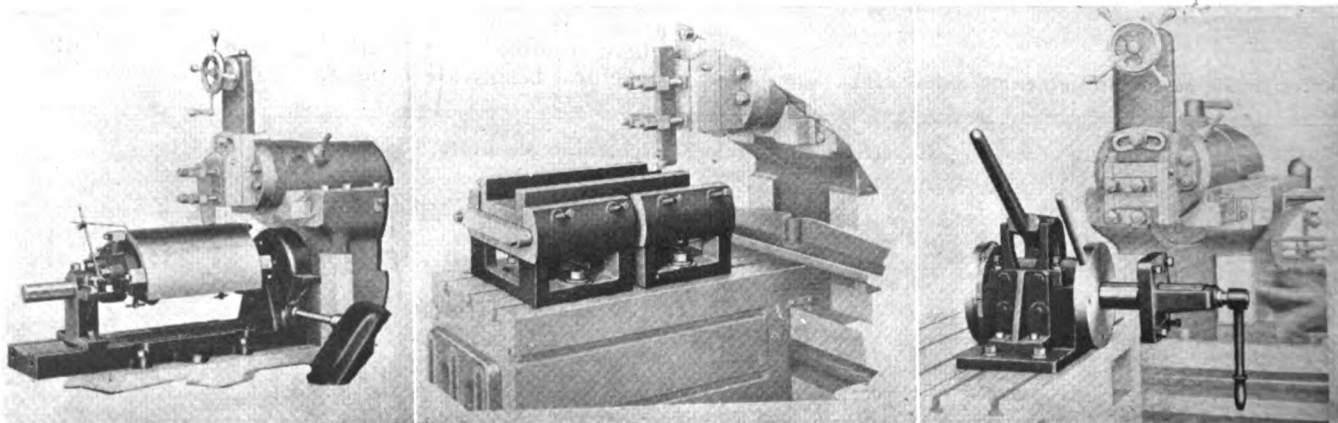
, Left: The crown brass attachment—Fig. 2, Center: The shoe and wedge chuck—Fig. 3, Right: The main-rod brass attachment
